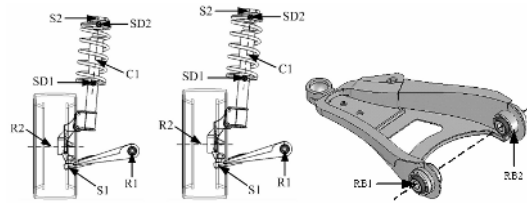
Kinematic joints for the front suspension: (a) model with ideal joints; (b) model with bushing joints; (c) revolute bushing joints in the suspension arm.
